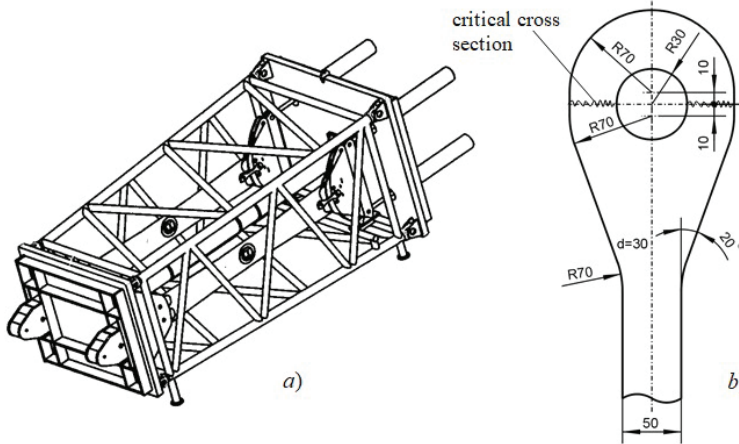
Fatigue testing machine (a) and testing bar (b)
